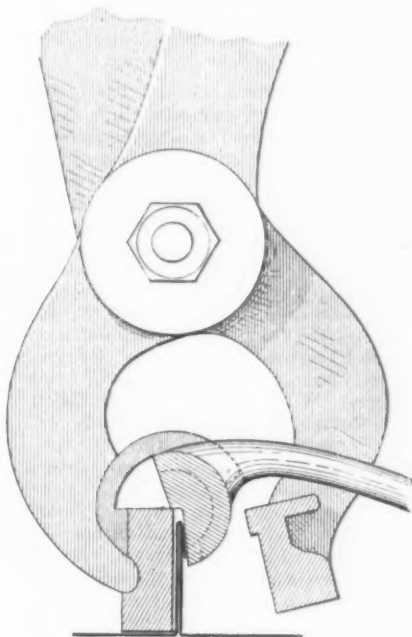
Cross-Section, Showing Position of Parts for the Seam Closed.
